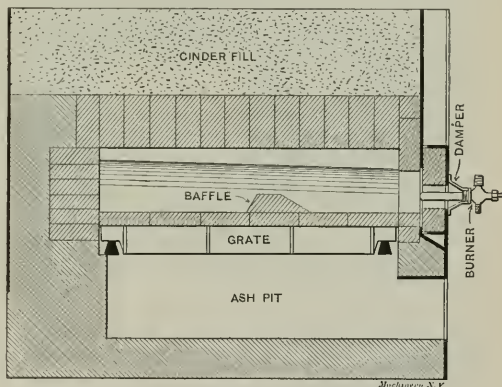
Cross-section, Refitted Casehardening Furnace.
